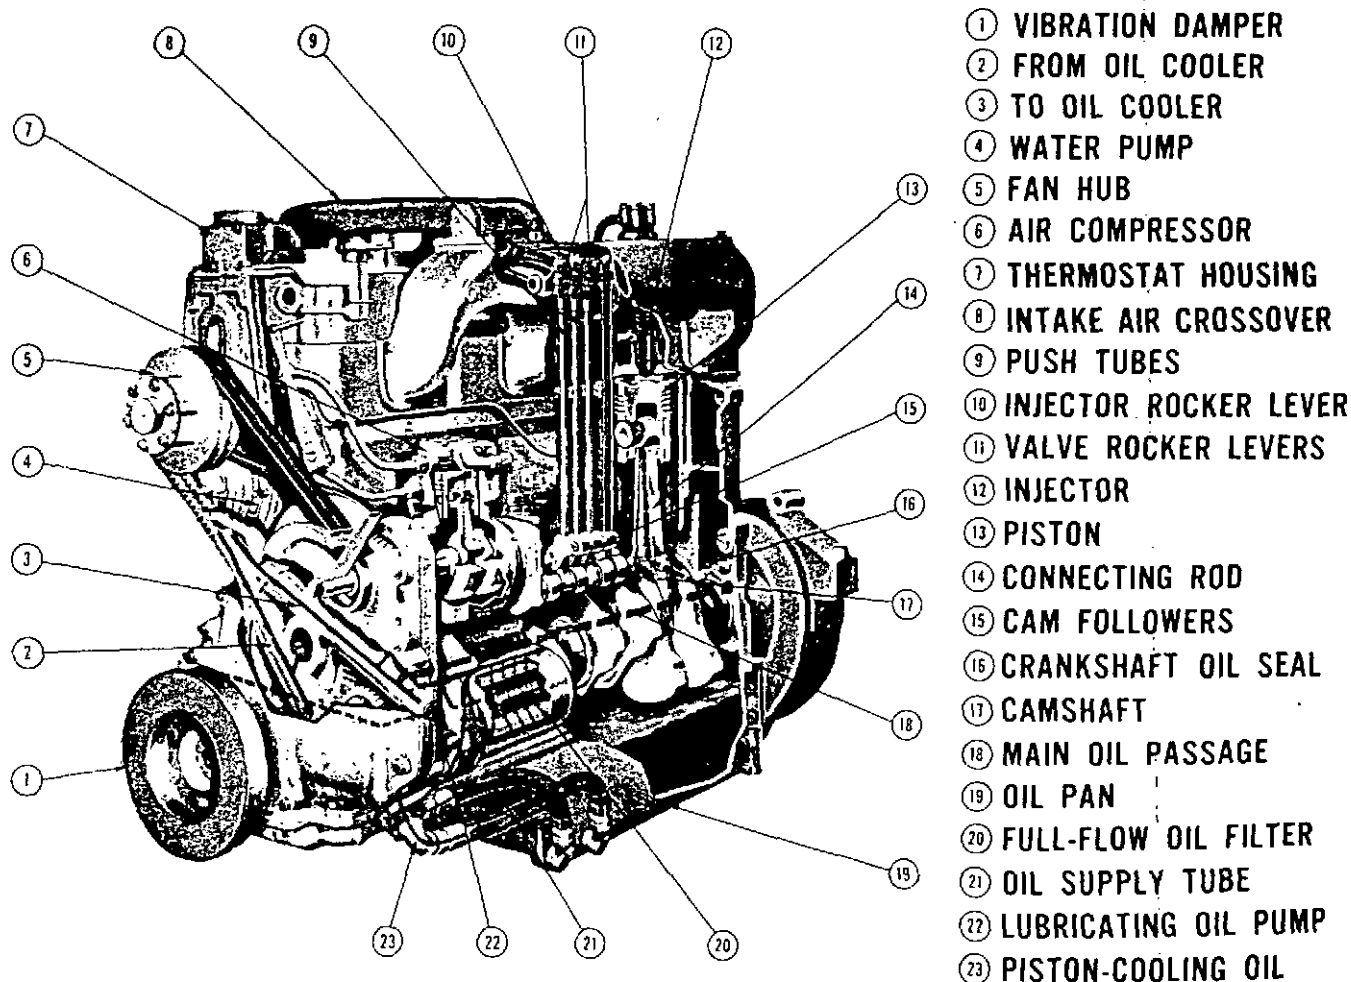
, LWC18. Lubricating oil flow - NT-380 Engine (fuel pump side)
